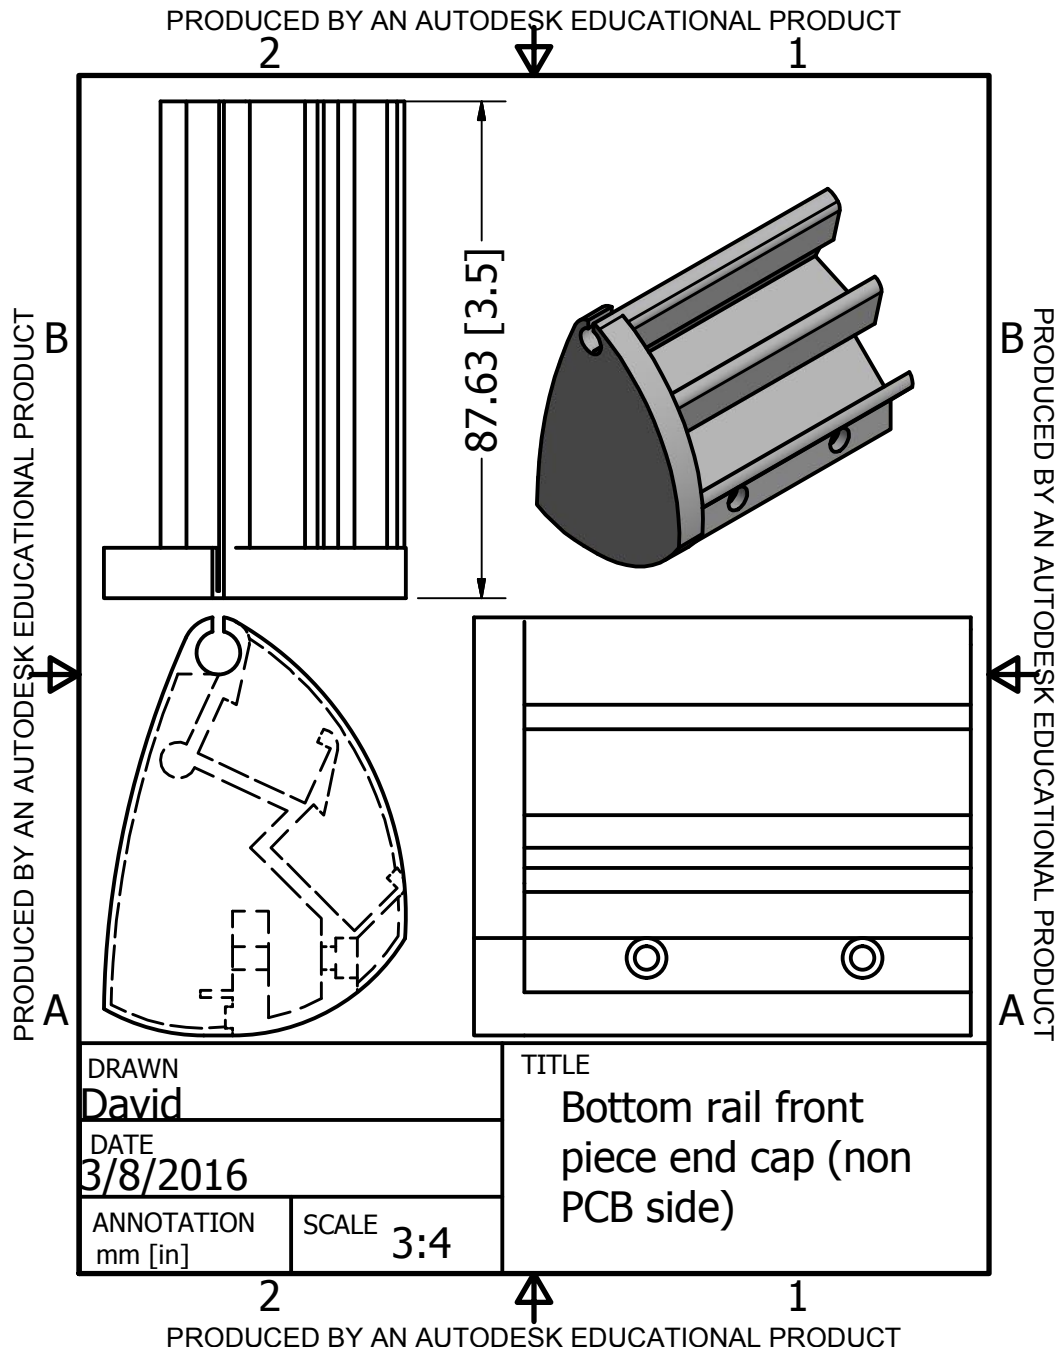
Mechanical drawing for the front piece of the bottom rail for the side of the bottom rail that does not accept wall adapter power.
